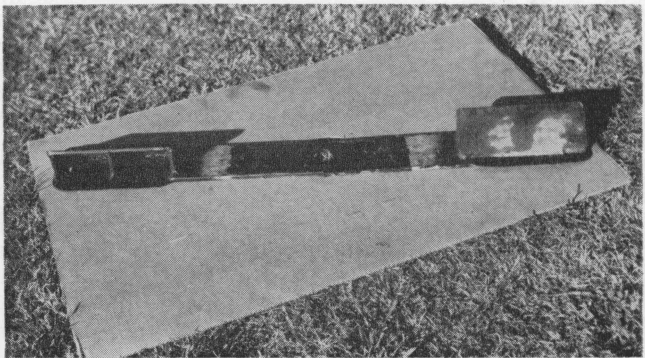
Modified lift-type blade used on machine 2, Table 15.
